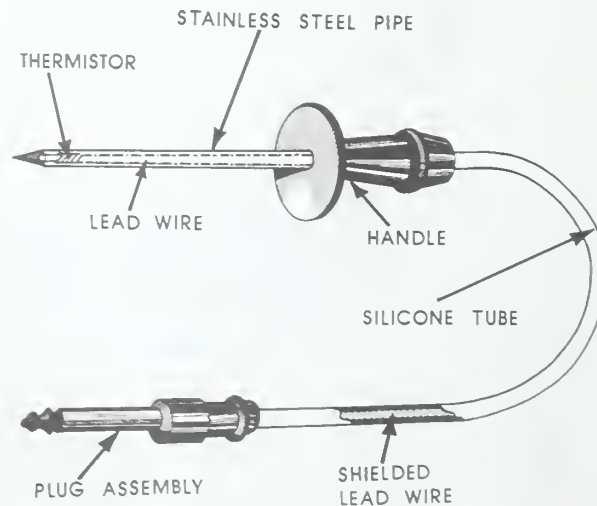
Probe assembly. (Courtesy of Michael S. Wagner)
